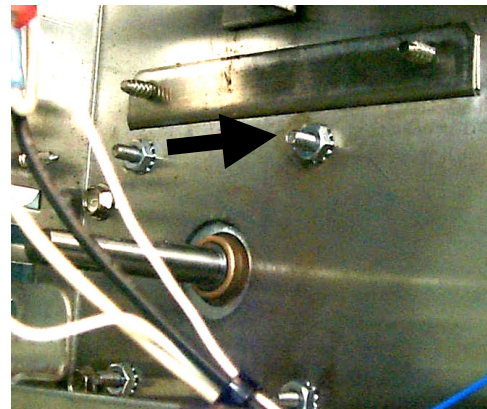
Check the mounting slots before tightening the motor mounting bolts to ensure the motor is shifted toward the front of the toaster.
